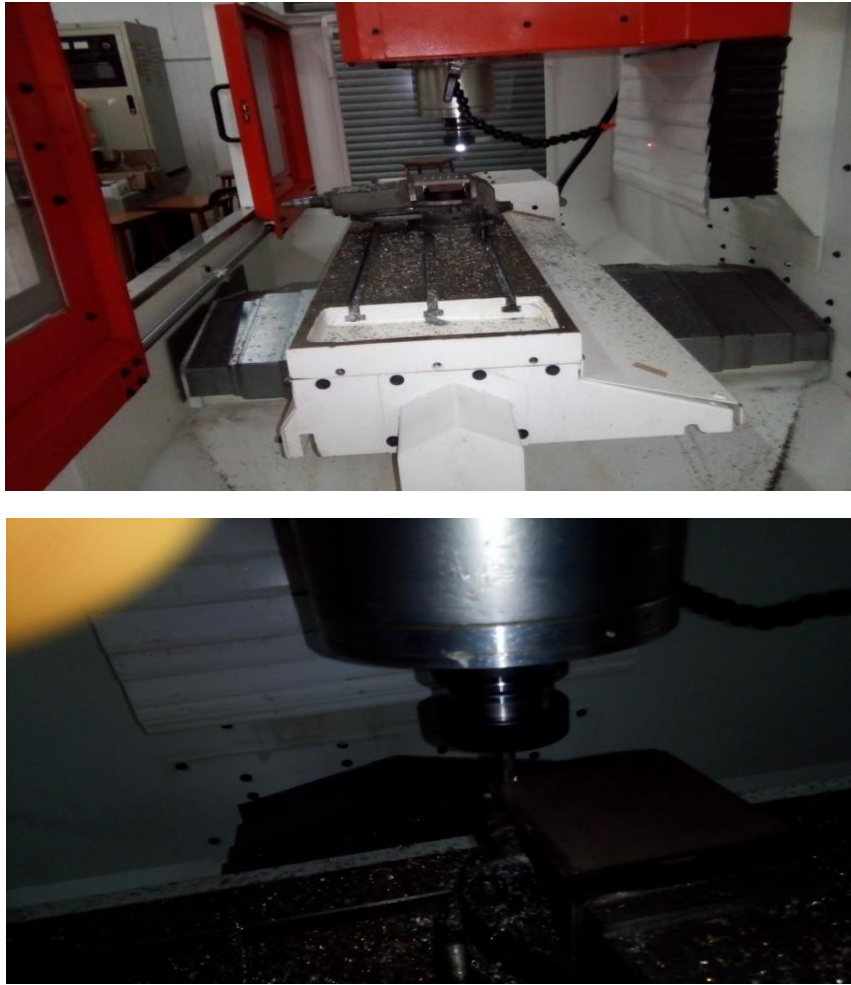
a) Three axis CNC vertical milling machine b) work piece mounted on the machine table
